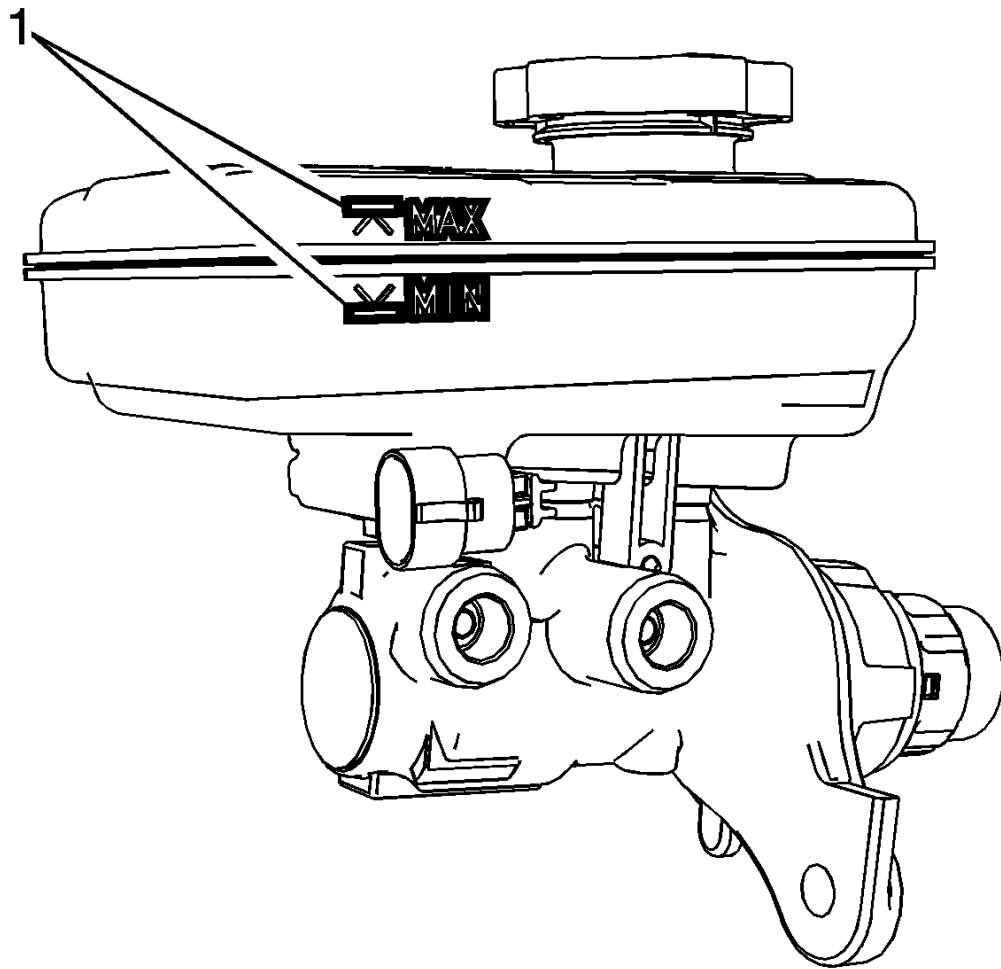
Inspecting Brake Fluid Level Through Brake Master Cylinder Reservoir
